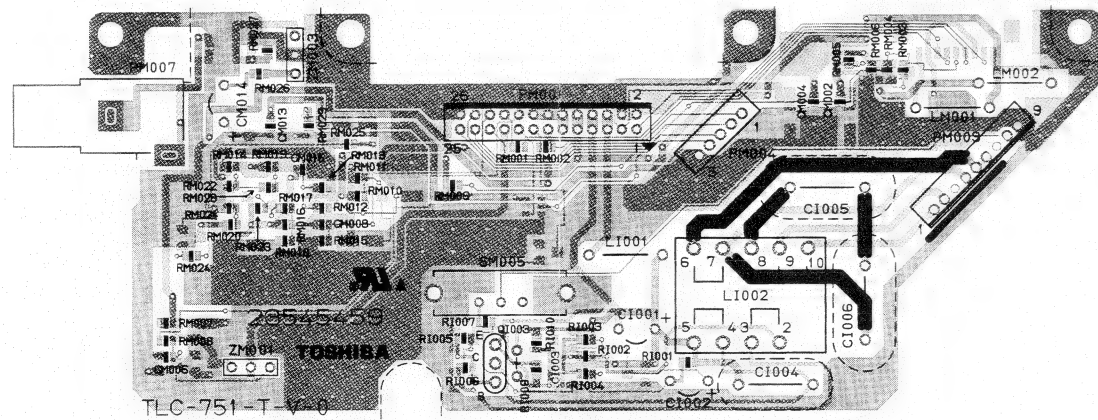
U0041 Inverter PC Board (Bottom Side)
